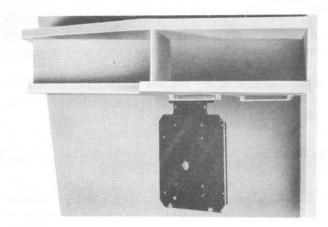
Hinged Mounting Plate on 20-type Shelf, Side View
